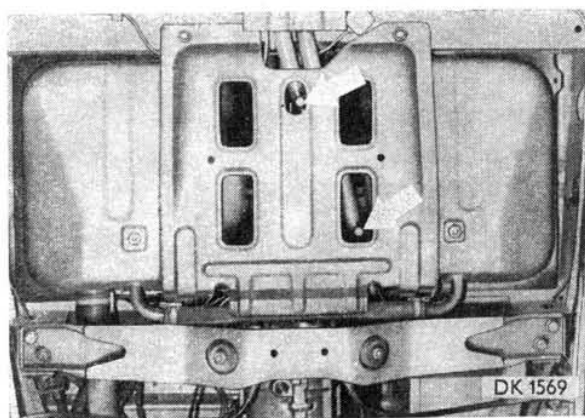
/3 - Fuel Tank Guard Sheet and Pipe Drain Plugs
